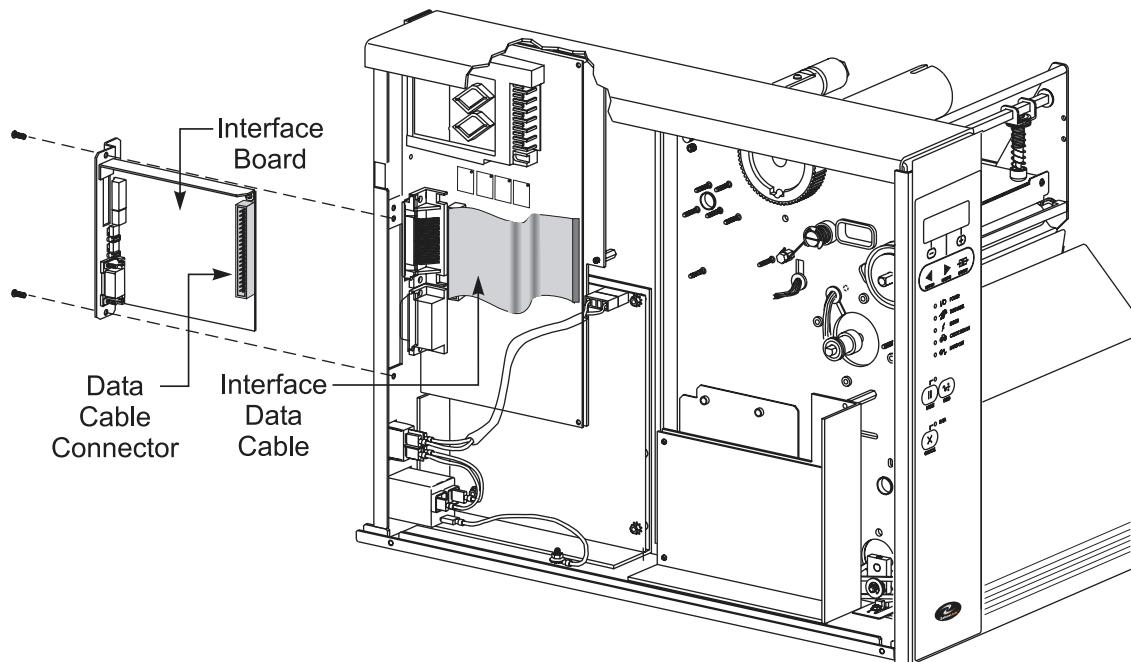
Twinax Interface Board Installation (Printer Configurations 10500-0XXX-XXXX and 10500-1XXX-XXXX)
